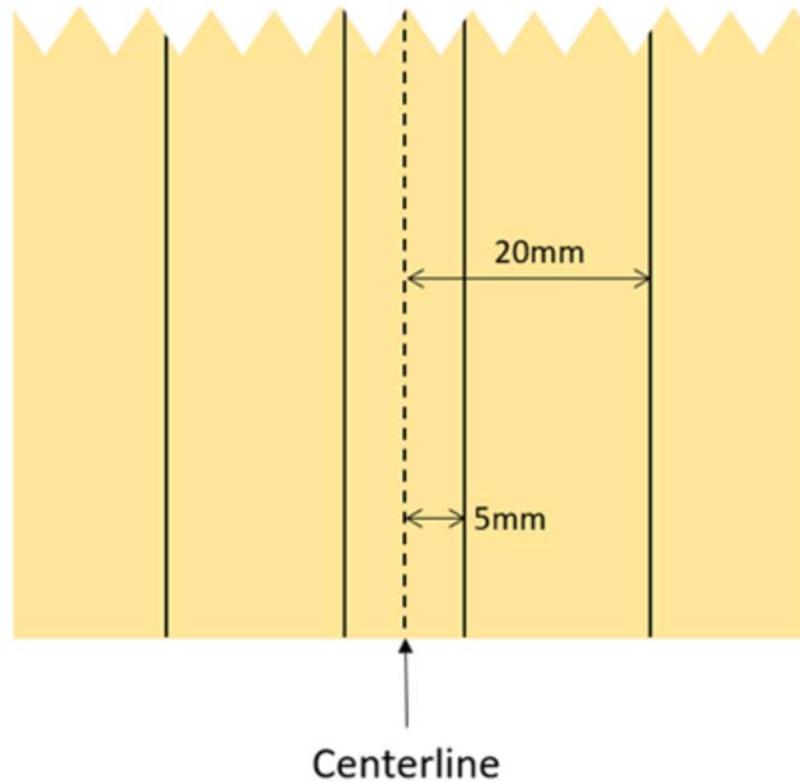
Dimensions for lines you will draw on your piece of cardboard.
